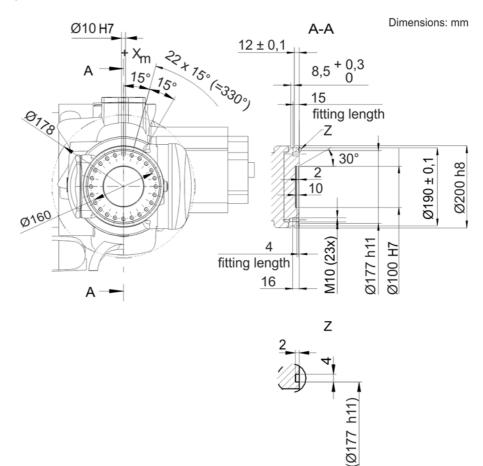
Mounting flange D=160 for F-HP in-line wrist
